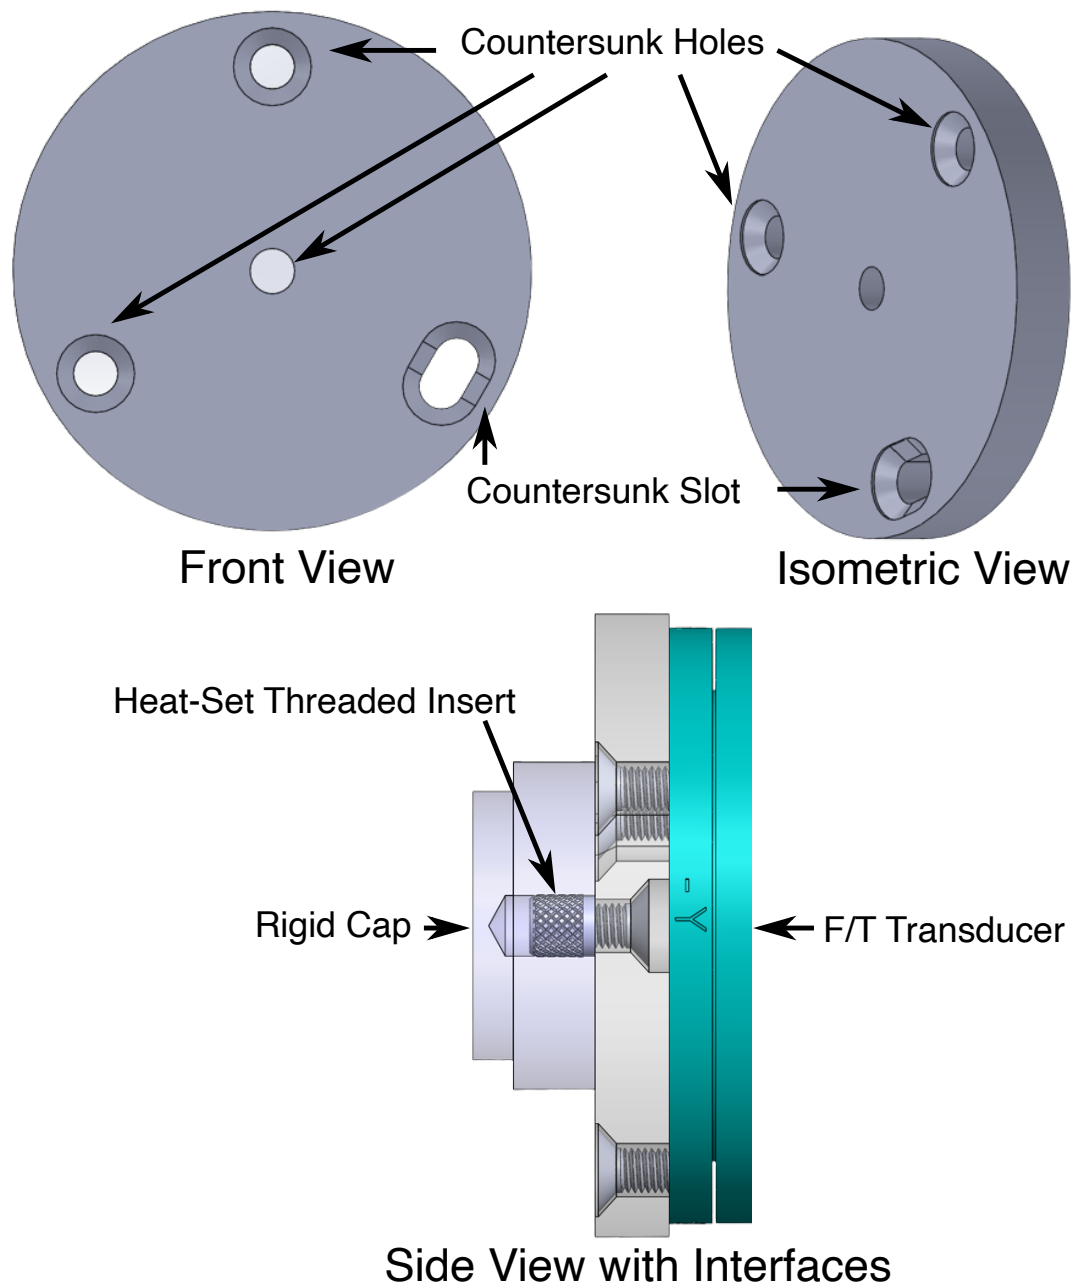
CAD model of the adapter plate which transfers actuator forces to the F/T transducer, shown in (a) front view, (b) isometric view. (c) presents the adapter plate and its interfacing strategy with the rigid cap and F/T transducer.
